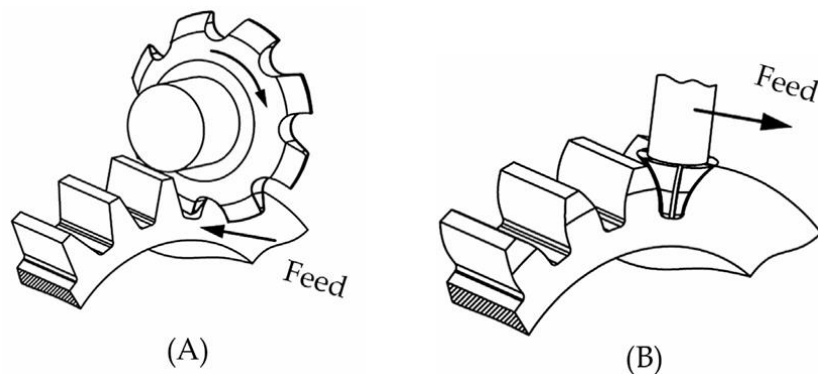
11: Gear milling; (A) milling by disc cutter; (B) milling by end-mill cutter.
